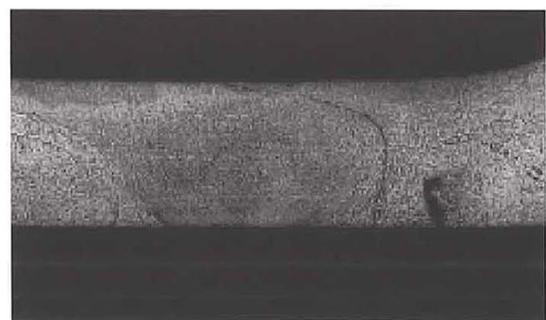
Macrostructure of weldment in tool position +2.0 mm (6N01-T5 alloy, 4 mm thickness)
